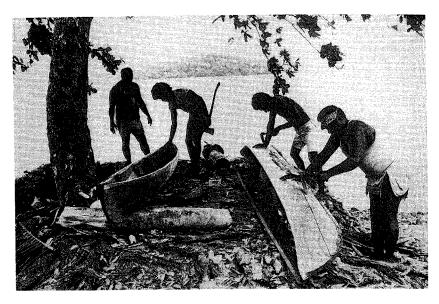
Completing two small dugout canoes at the village shore. Chea, Marovo Island, 1986. (Edvard Hviding)
